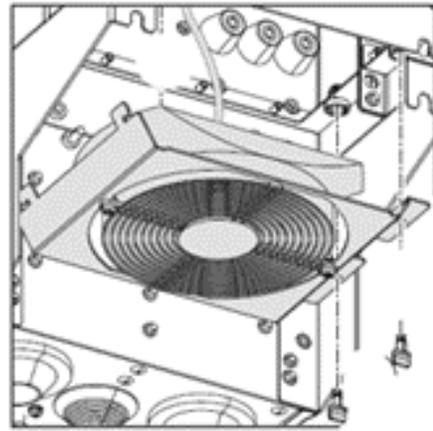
Main Fan Remove (Frame Sizes R1 up to R4)
